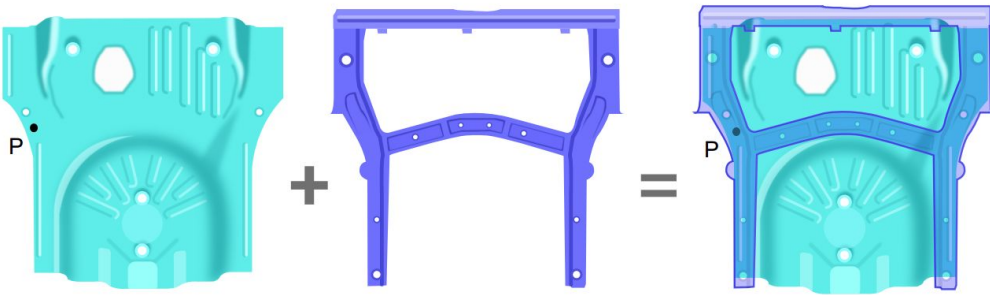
Two car parts are assembled by platform robots performing geometry tasks. After the assemblage, the welding point P becomes inaccessible to further reinforcing welding procedures, therefore creating an incompatibility restriction between specific tasks.
